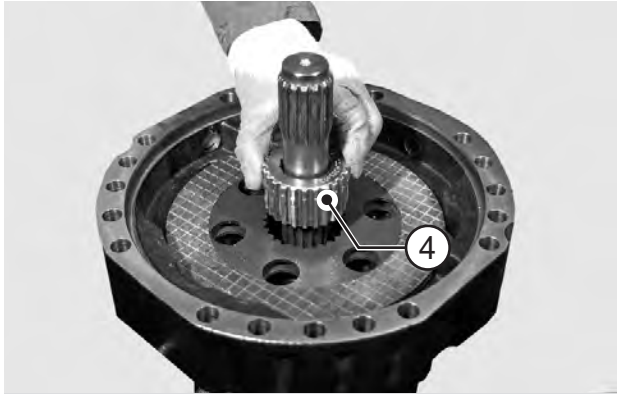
Remove the flange (4) complete with the discs. Write down direction of assembly.
